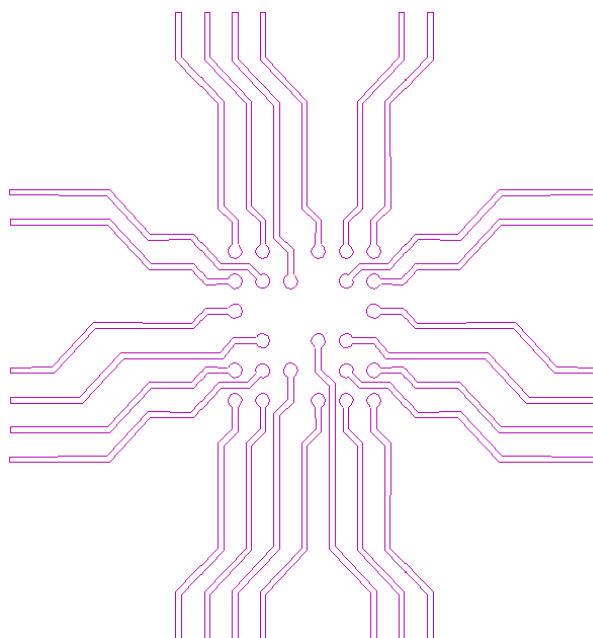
• Suggested Board Layout for NSMD, Line Width 0.1 mm, of Soldered Pads for CS281 CSPs (PCB Top Layer)
